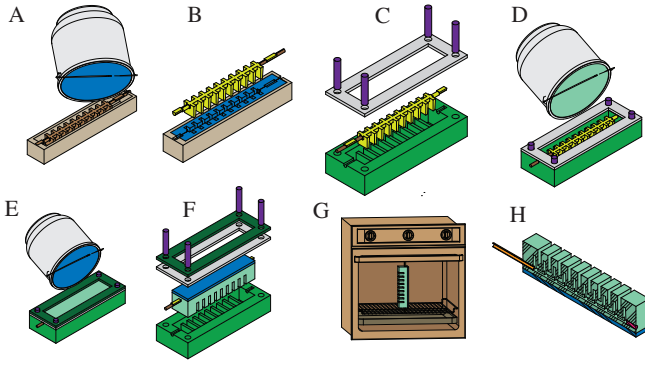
Gripper fabrication process. (A) Pour and cure a rubber mold, (B) pour wax core with embedded supportive rod, (C) combine bottom mold, top mold and wax core using pins, (D) pour rubber into assembled mold, (E) pour stiffer rubber on top of the cured gripper to form a constraint layer, (F) remove cured gripper from mold, (G) using an oven melt out wax core from the gripper, and (H) add silicone tubing and plug using silicone sealant.
